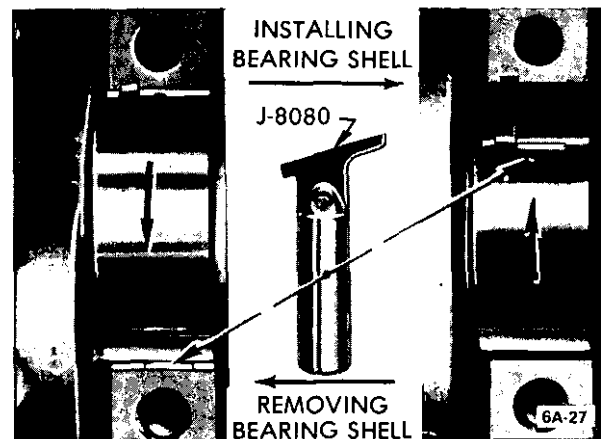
A-27 Removing and Installing Crankshaft Bearing Upper Shell
